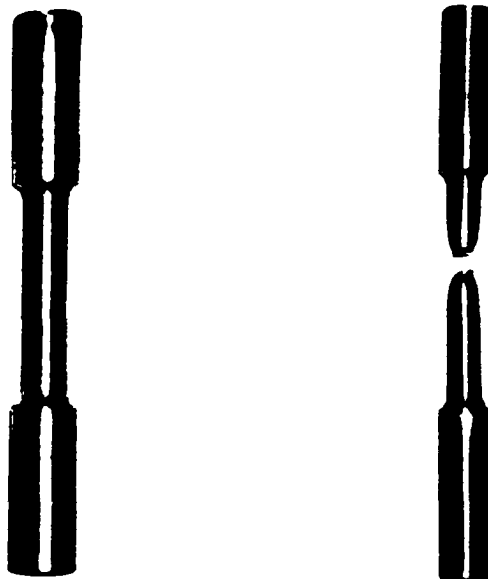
Flange samples of HPS70W for uniaxial tensile tests - Perpendicular to rolling direction
